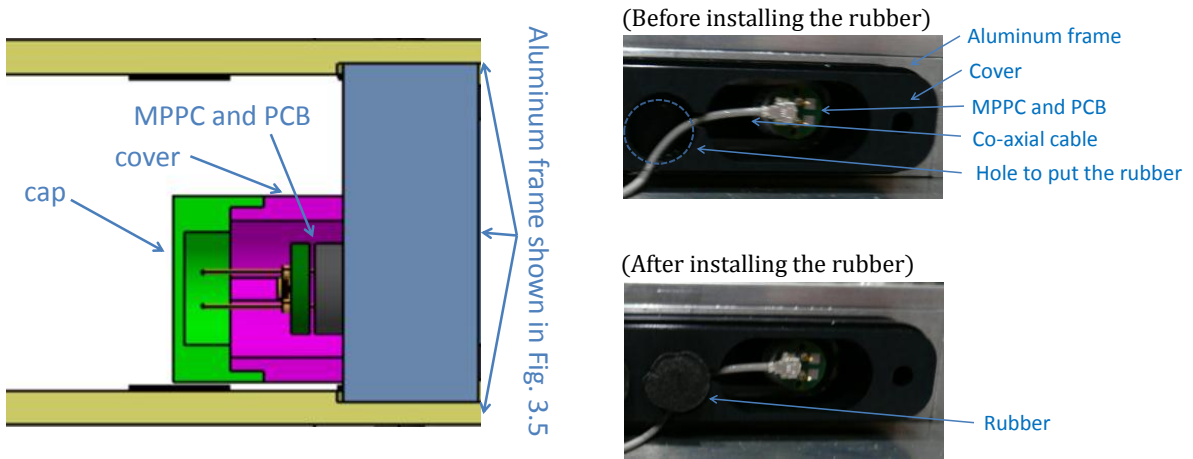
(Left) Components around the MPPC and the PCB. (Right) Photo of the cover. There is a hole on the cover in which the black rubber is put to prevent the light leak and hold the cable. The cap is not shown in this photo.
